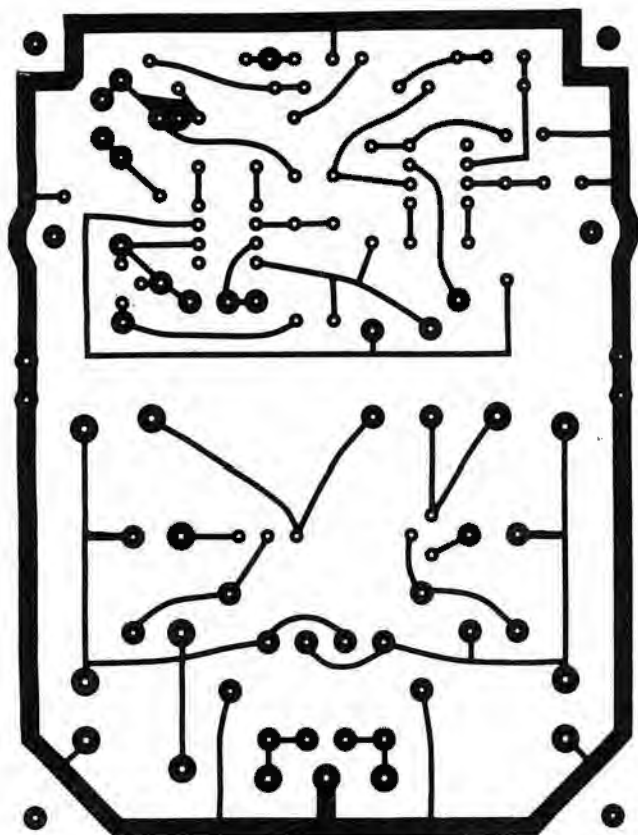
Actual size etching and drilling guide for pc board for the ohms and ac converter is shown at left, components placement above. Board can be separate from power supply if desired.
